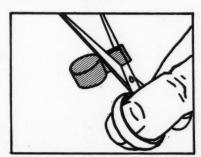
Band held with a pair of soldering tweezers, preparatory to soldering with soft silver solder.
